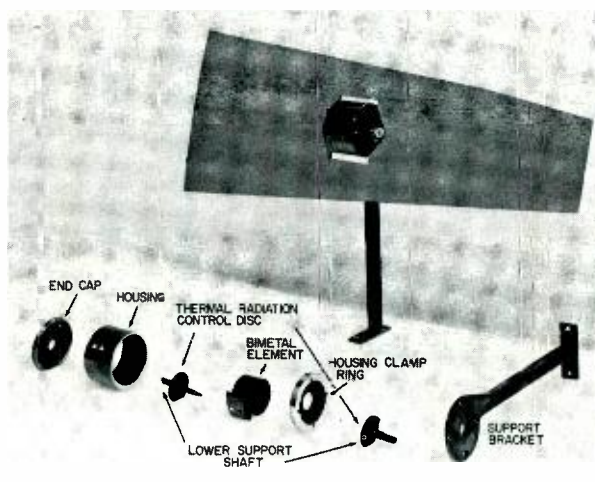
Center-mounted louver assembly showing also the primary parts.
